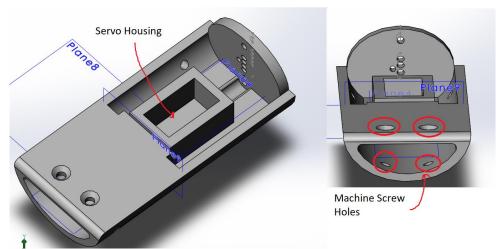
Left image: Lower arm with servo housing. Right image: Lower arm with holes for M6 machine screws.
